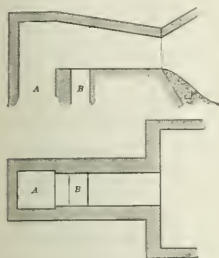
PART OF O. H. FURNACE USING PRODUCER GAS
